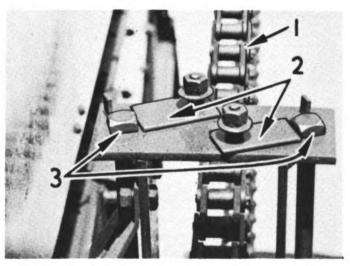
Takeup for bucket line drive chain showing lock plates and takeup bolts.
